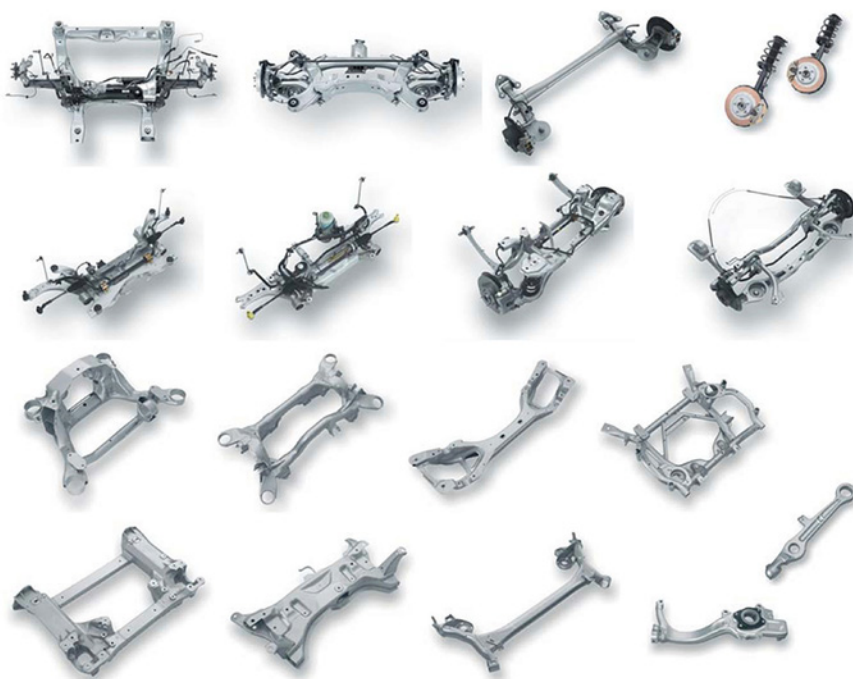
Chassis components and modules produced by BENTELER (Picture: BENTELER)
